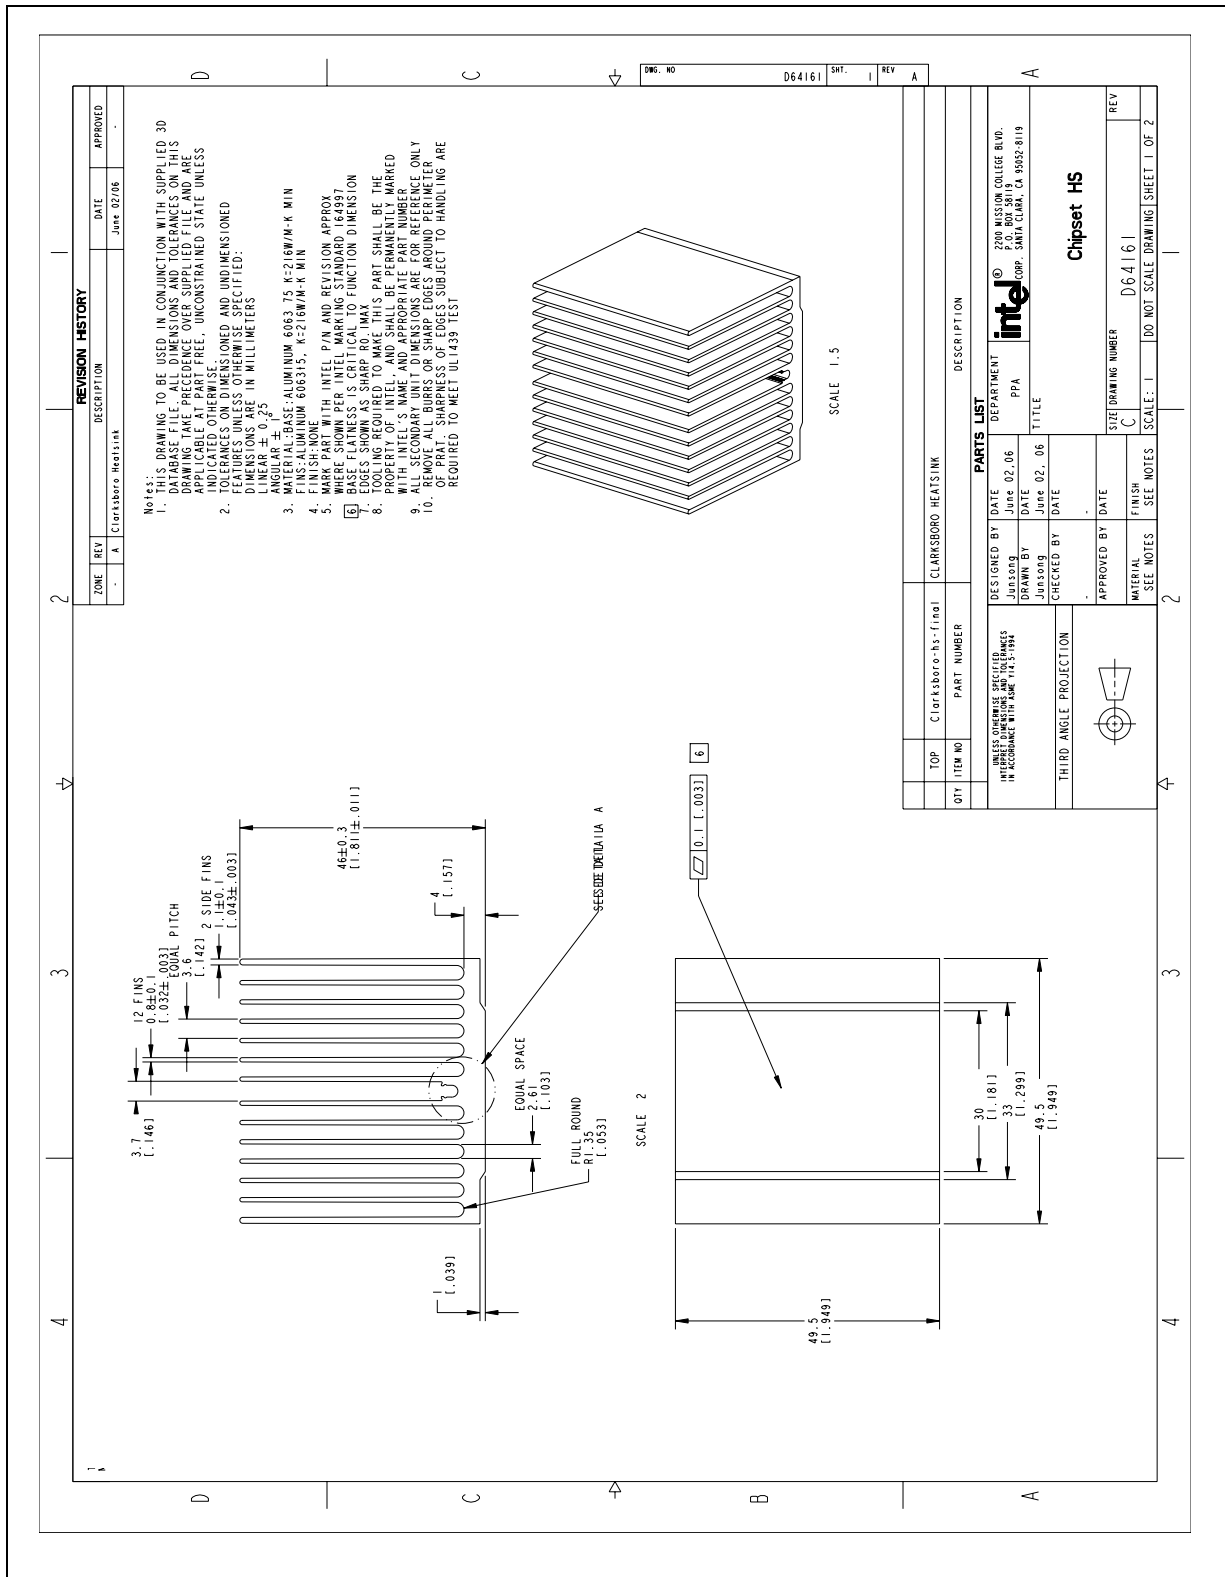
Intel 7300 Chipset MCH Heatsink Drawing (3 of 3)
